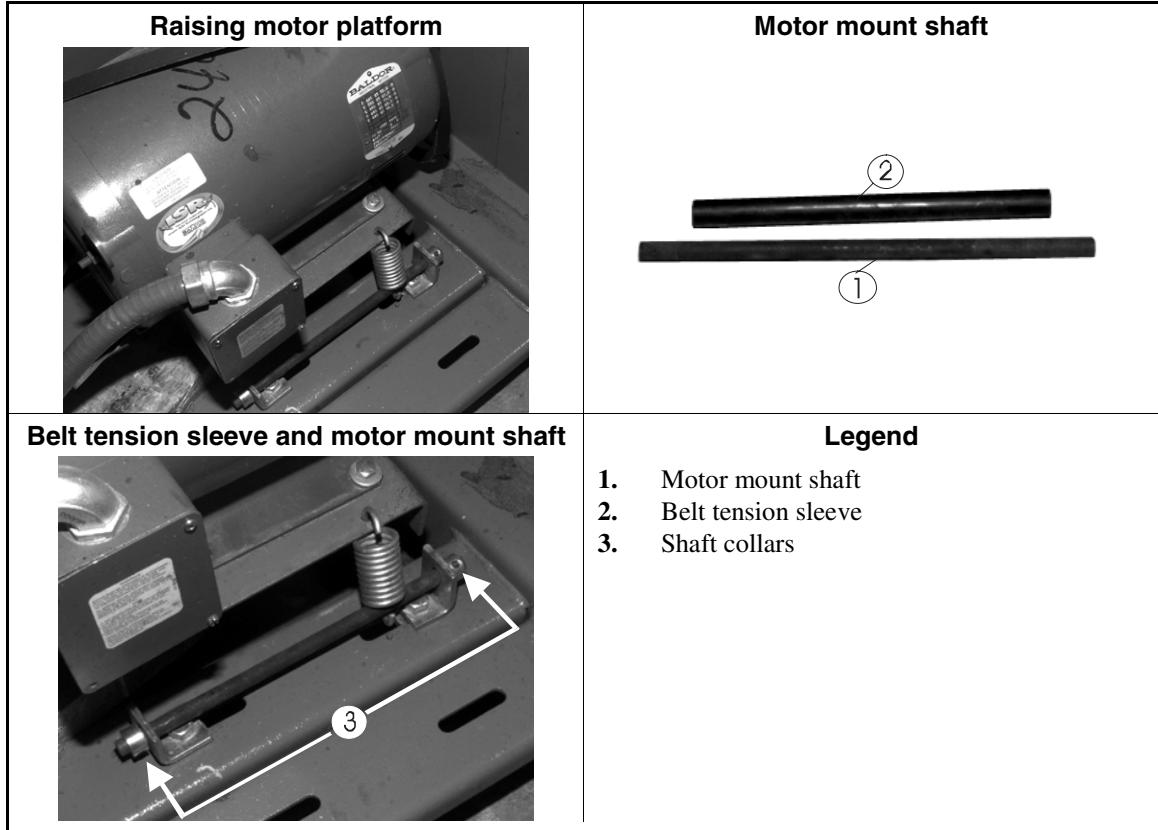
Belt Tension Sleeve Over Motor Mount Shaft
